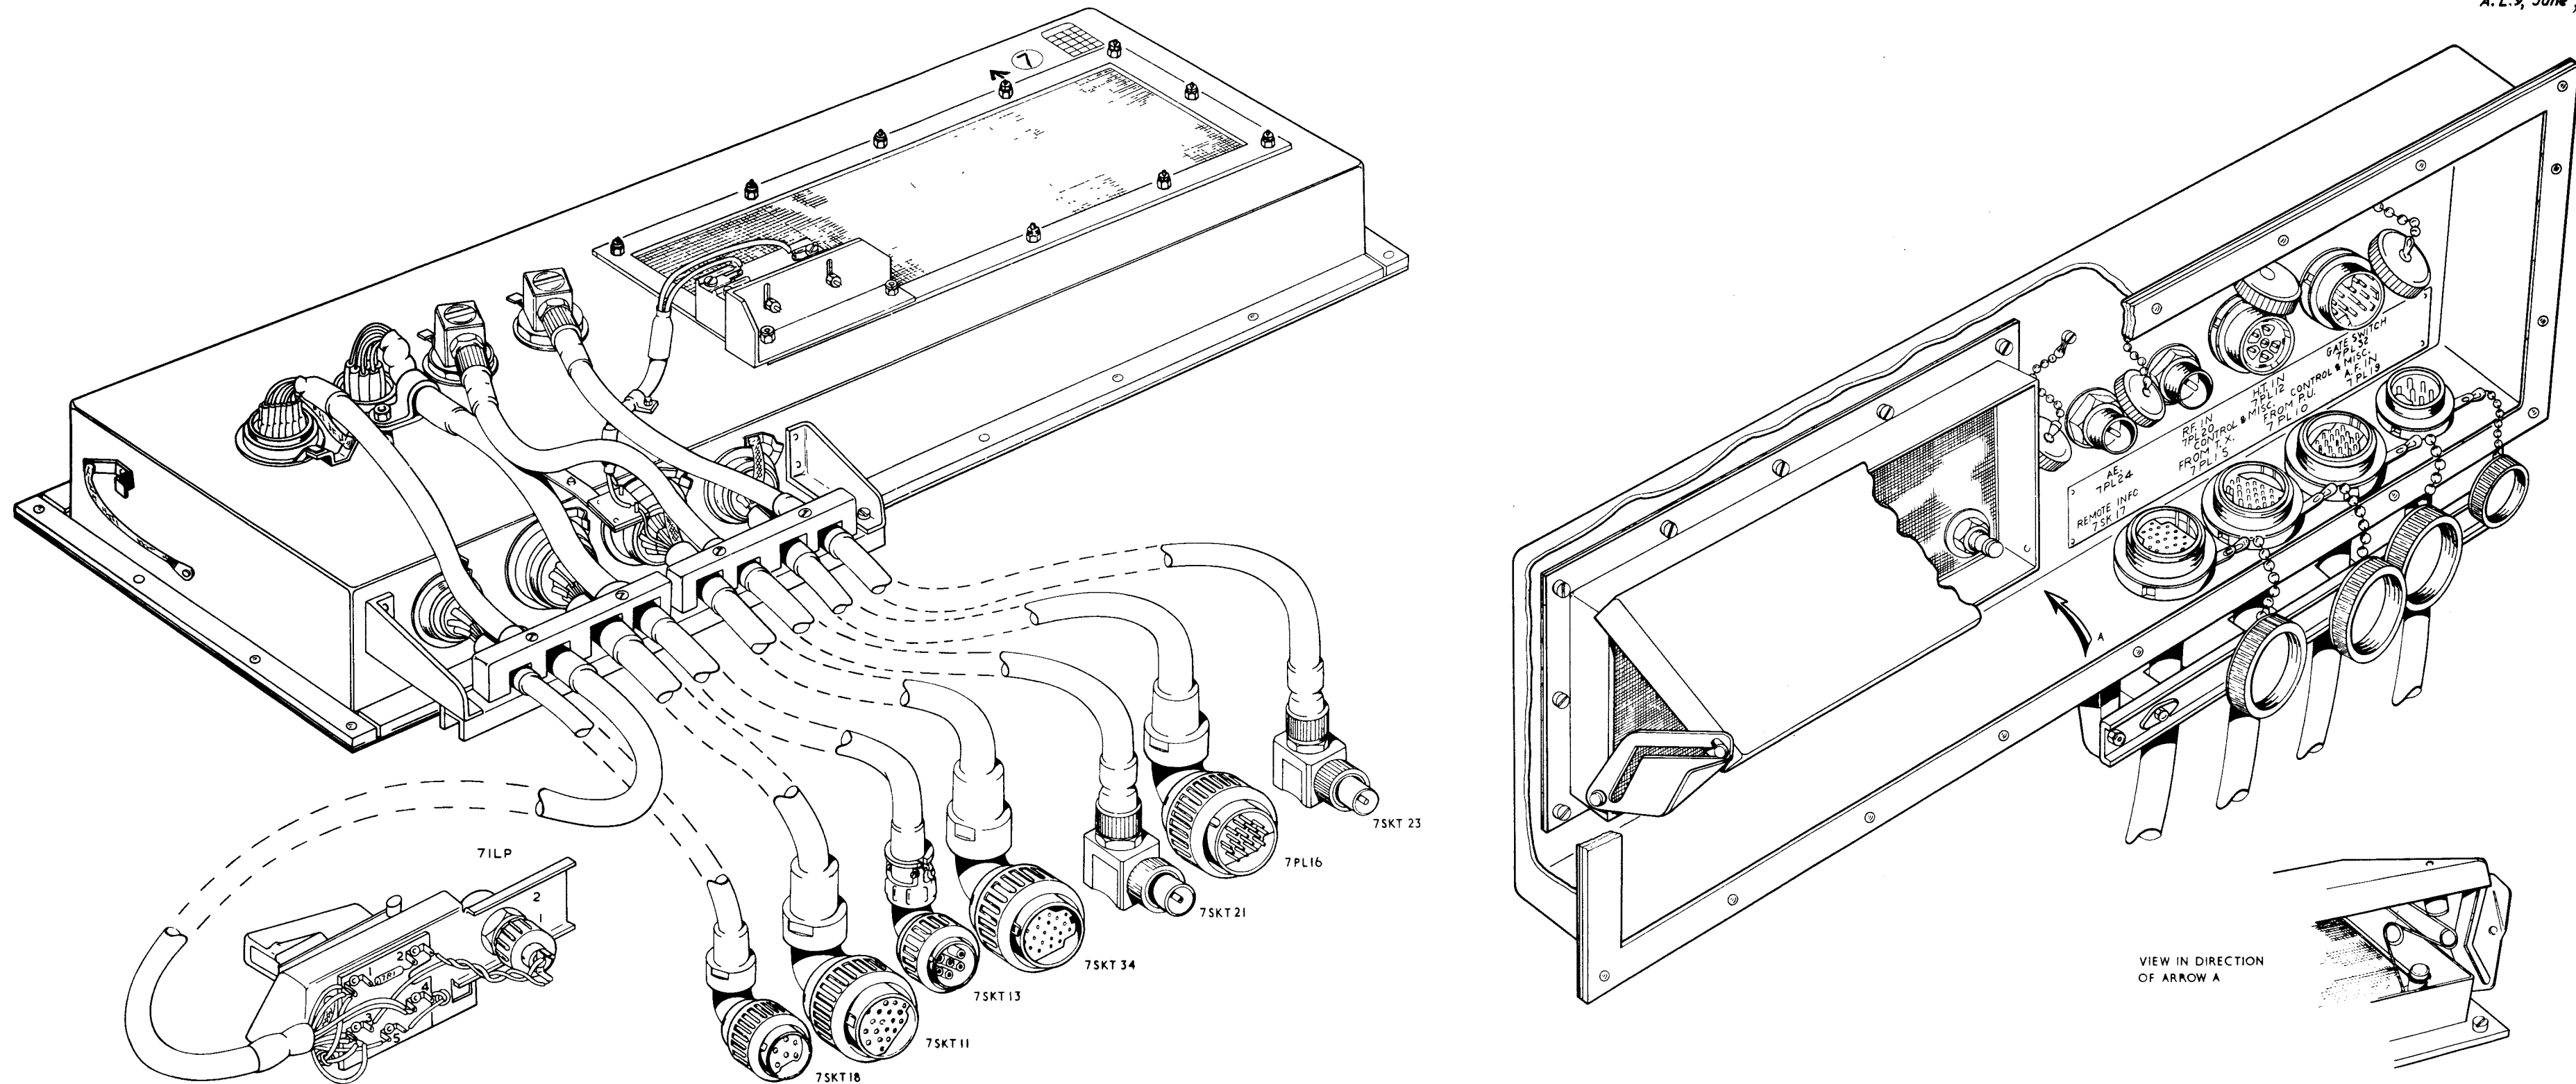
Layout of cable assembly composite 5995-99-999-2600 in cabinet
